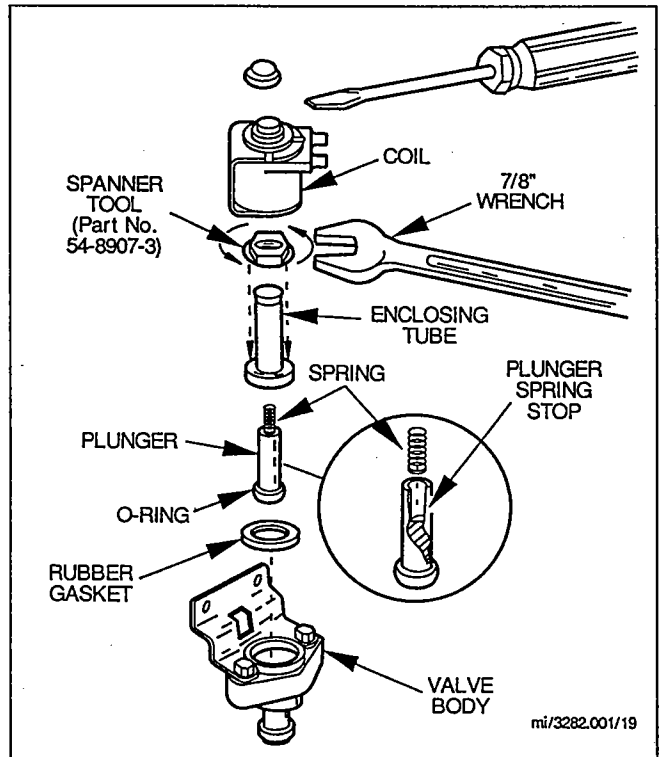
BRASS BODY WATER DUMP VALVE DISASSEMBLY
